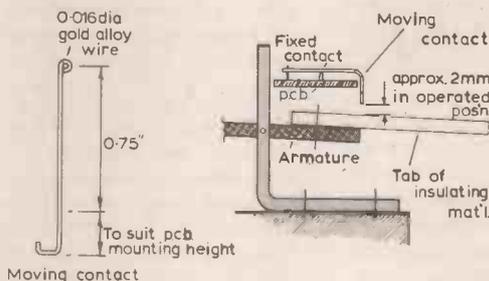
Contact details for a single-magnet tab. A pin jig should be made for forming the moving contact.
